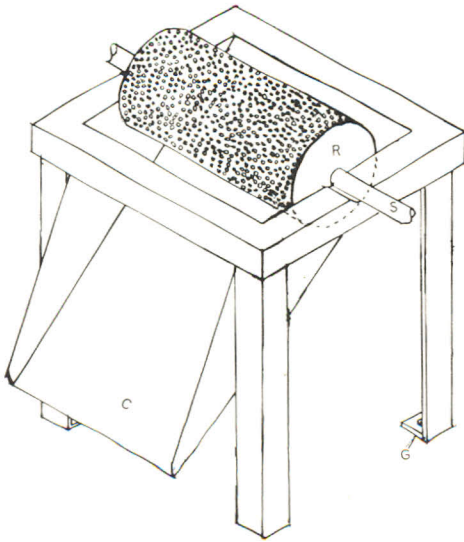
B. Prototype cylindrical grater: isometric view of the stand and roller.
